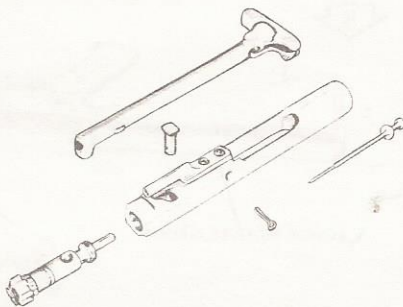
Disassembly/Assembly of Rifle (Page 2 of 4)
